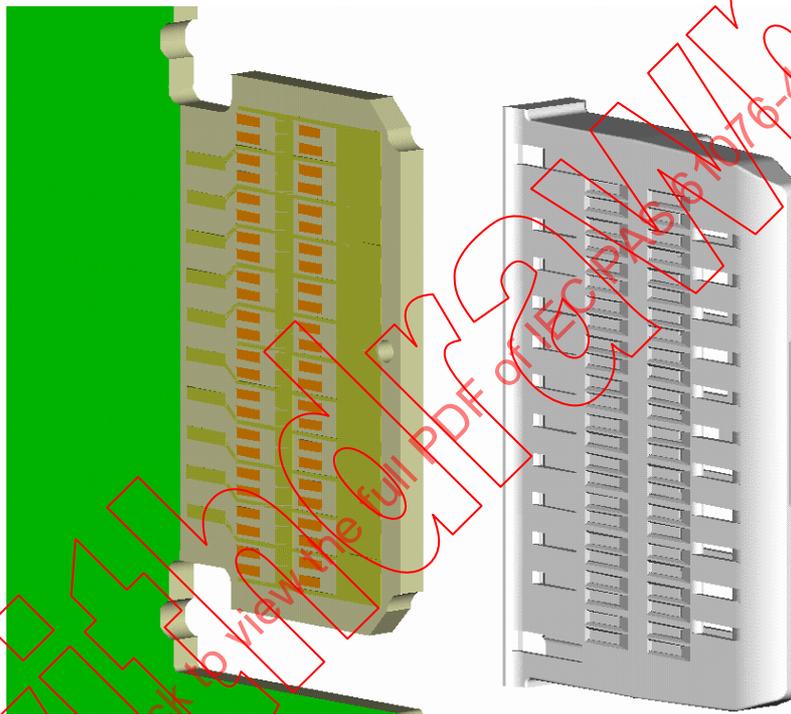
Example of a paddle-guard, to be mounted on the plug-in card paddle
